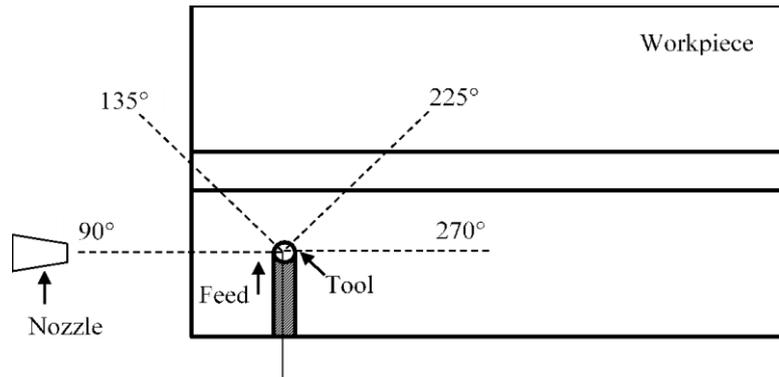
MQL nozzle direction based on the feed of the cutting tool
